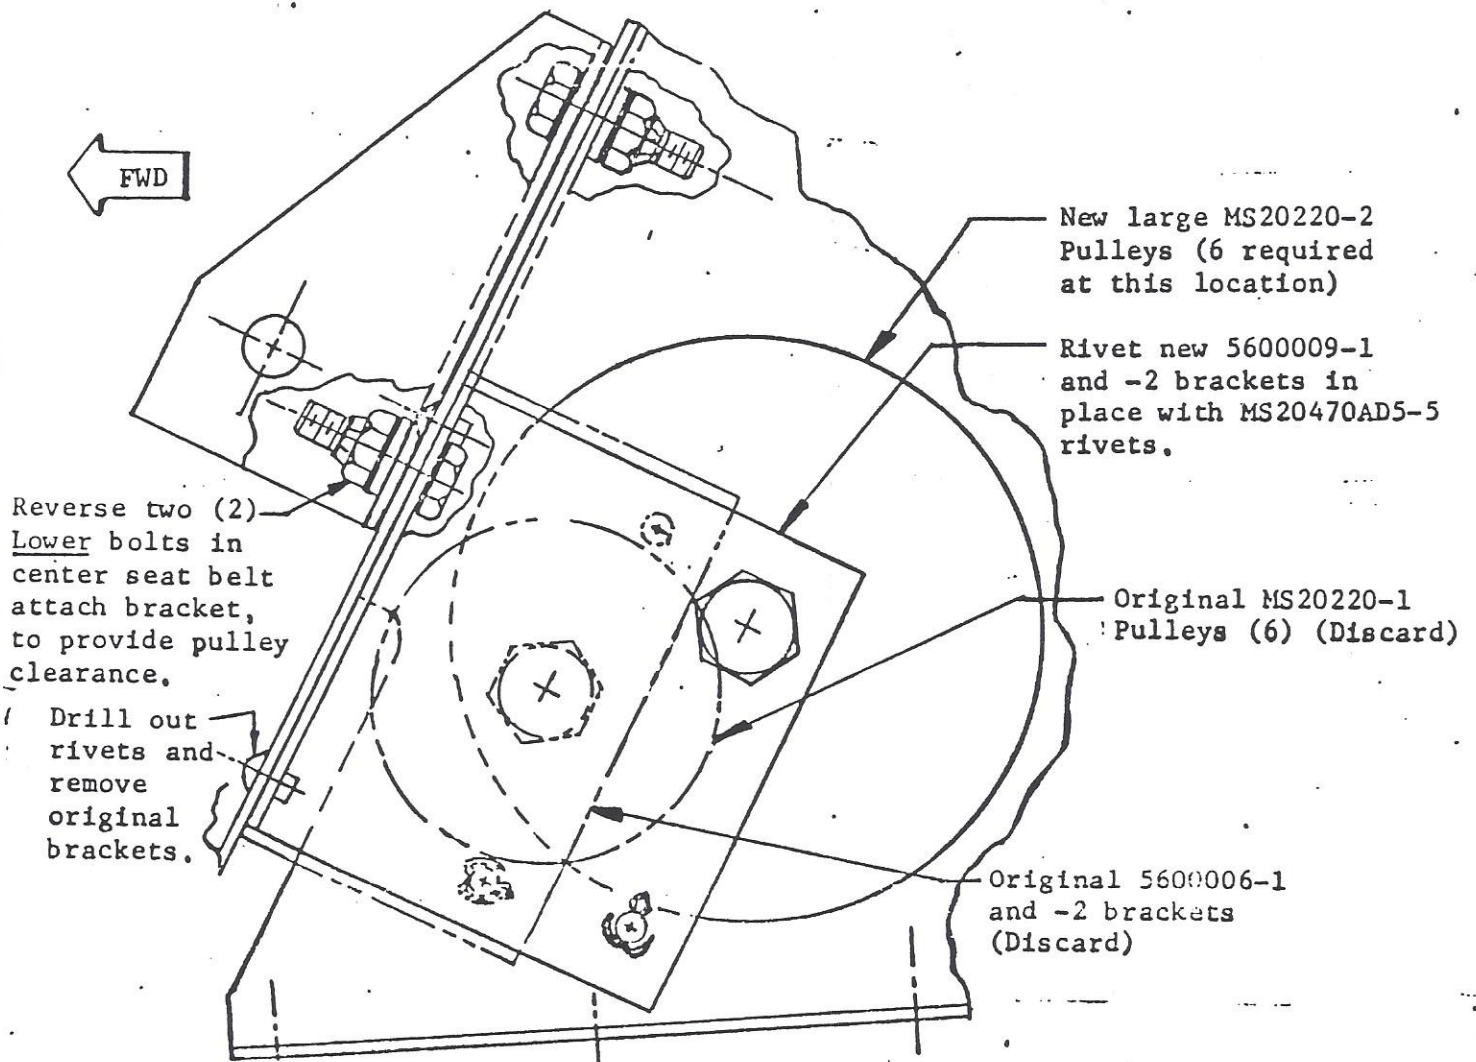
Drilling New Pulley Shaft and Cable Guard Pin Holes - Aft
